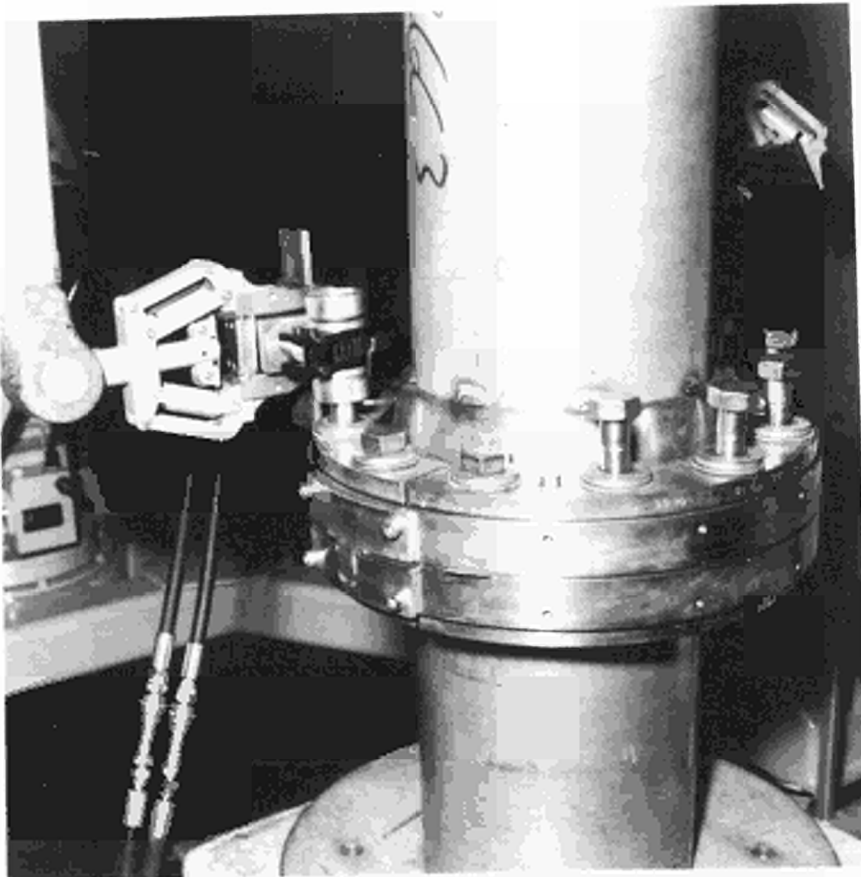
Mascot III using hydraulic wrench to bolt RH flange.
